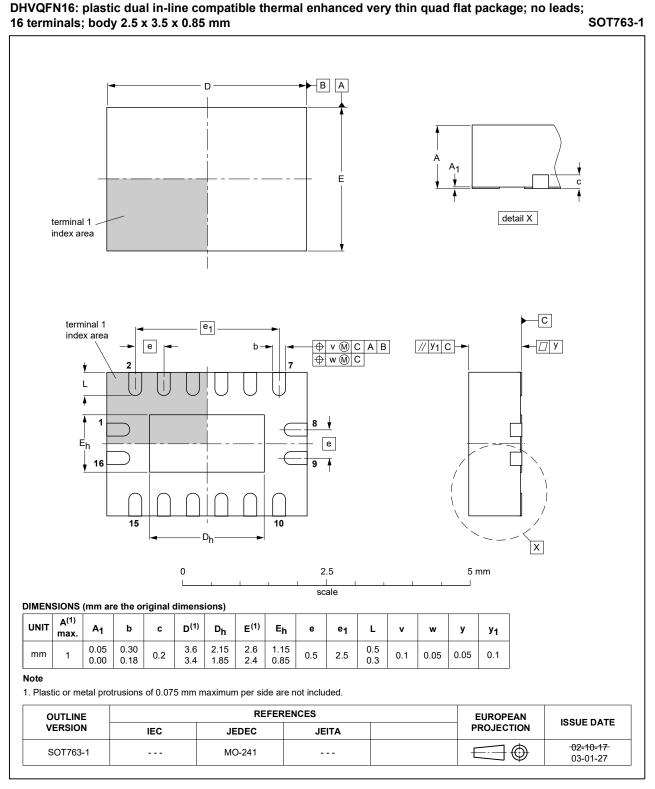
Package outline SOT763-1 (DHVQFN16)
